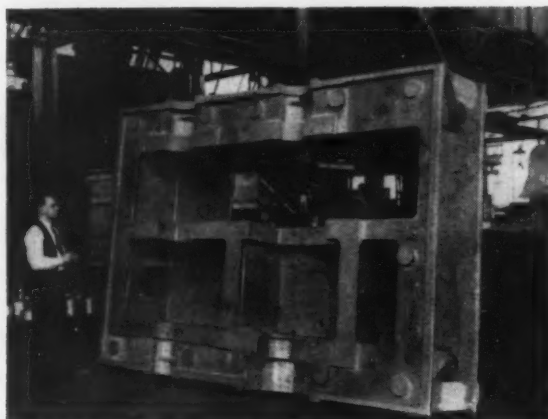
The large steel castings used for bearing supports in this scale breaker drive base weldment are locally heated with gas torches during welding, to minimize tendency to cracking.
